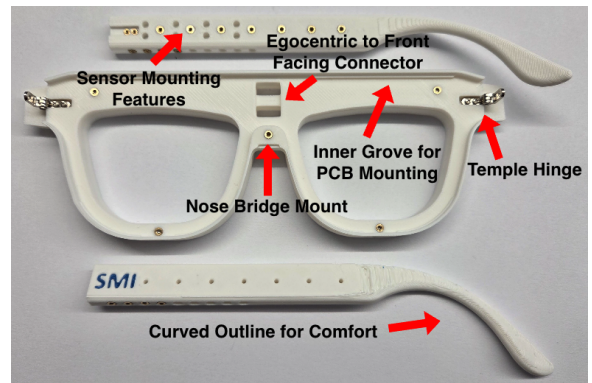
The 3D printed front and temple frames with hinges and heat-set threaded inserts installed.
